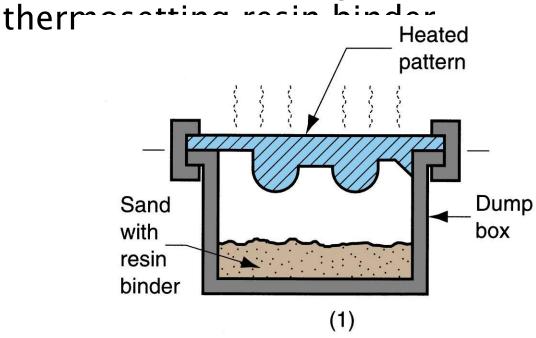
Steps in shell-molding: (1) a match-plate or cope-and-drag metal pattern is heated and placed over a box containing sand mixed with thermosetting resin.
